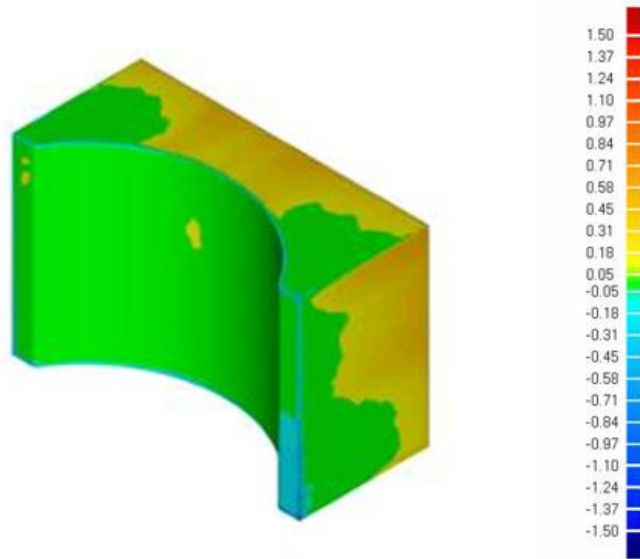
Accuracy results of a cranio-plate press tool prototype.
